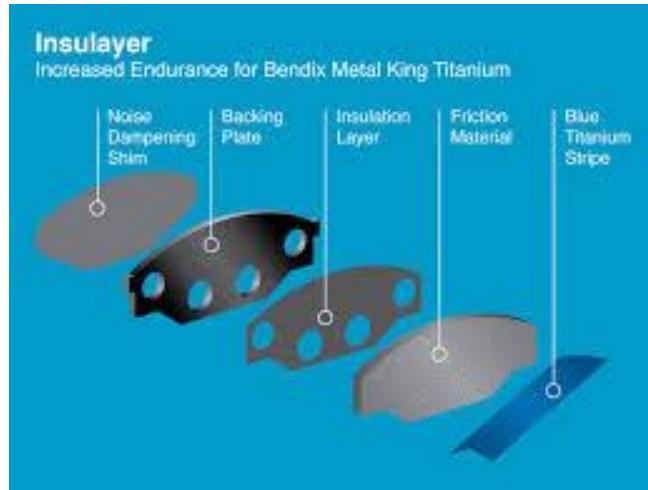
Diagram of a brake pad assembly[11].
